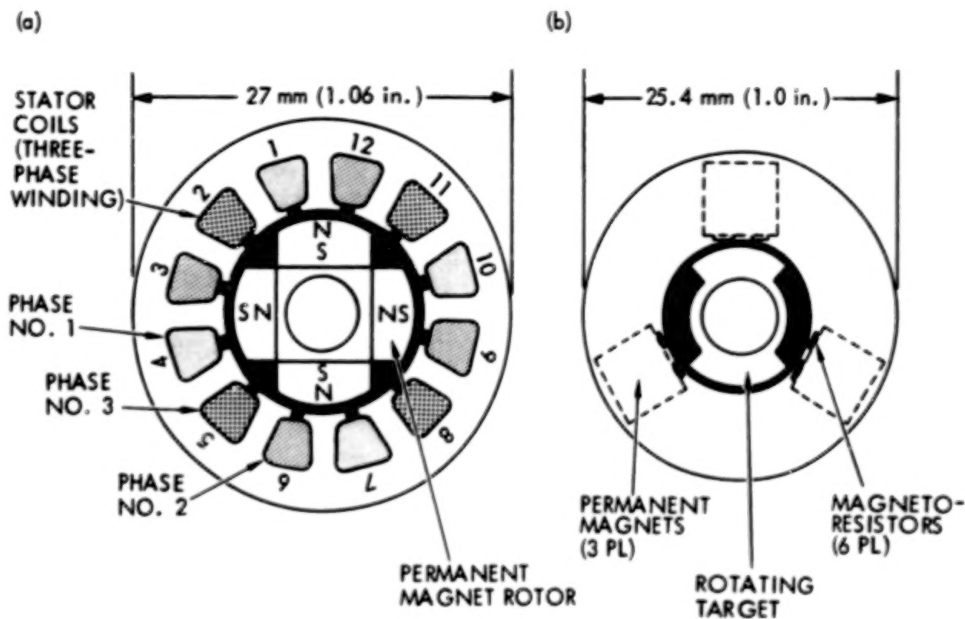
Motor mechanical construction: (a) rotor/stator design, (b) rotor position sensor
